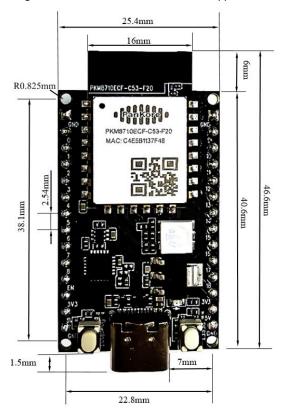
PKE8710ECF-C53-F20 Board Dimensions
